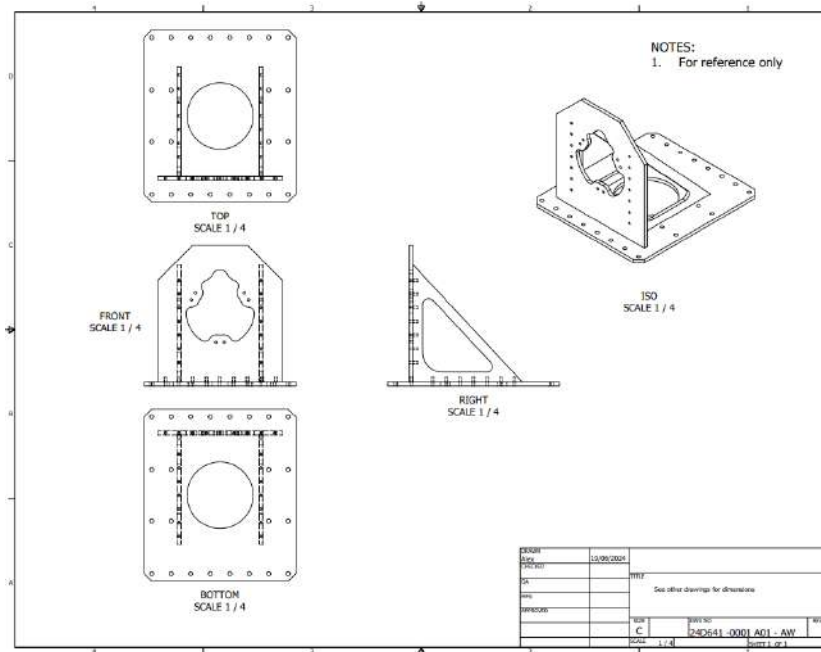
Drawings for fabrication of L-bracket used to support engine during testing.
